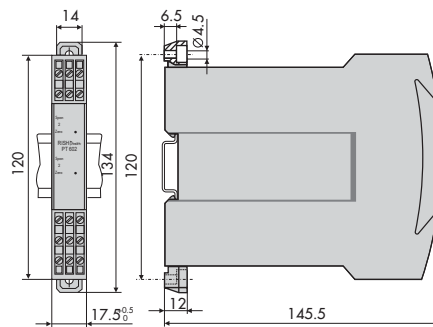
in housing S17 screw hole mounting brackets pulled out.
